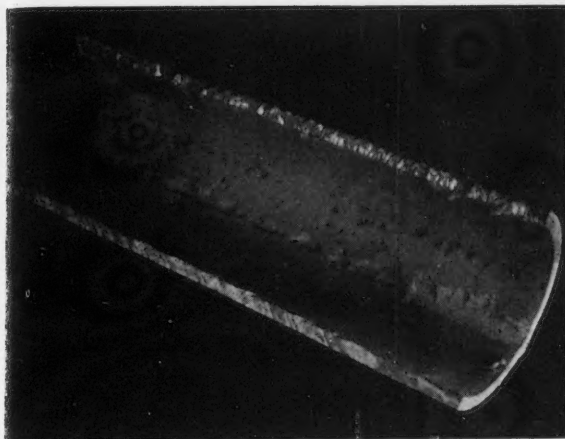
Pitting of furnace tube caused by incomplete flushing.
